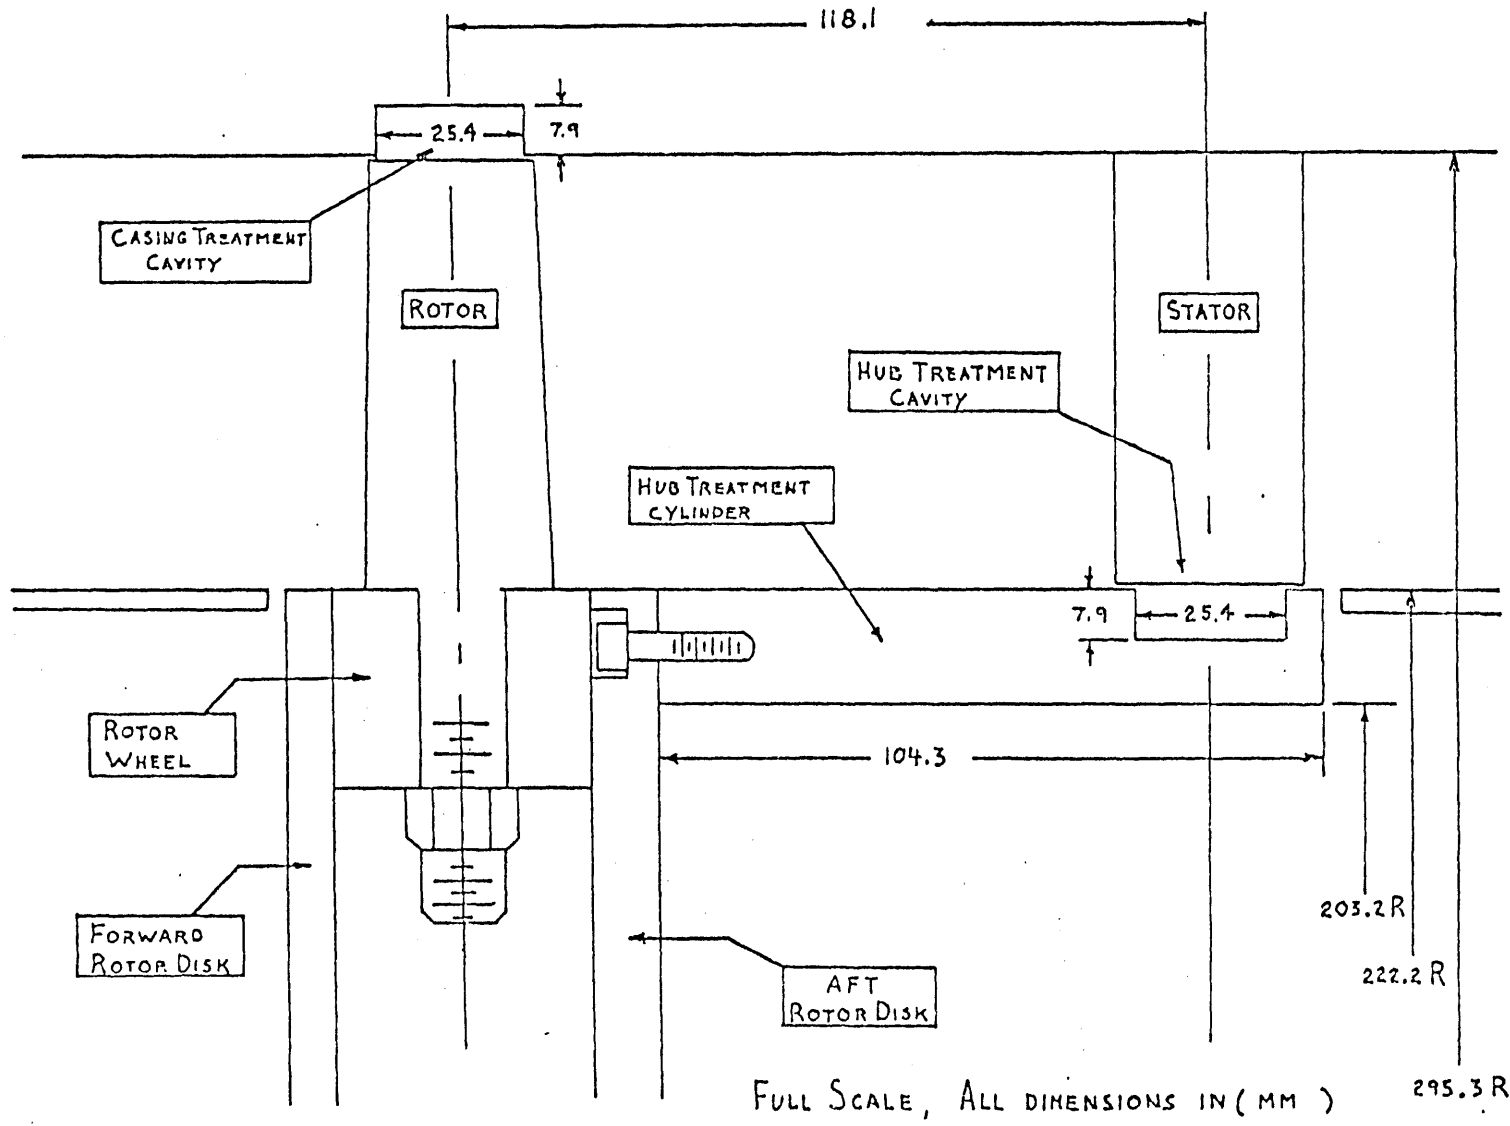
ROTOR/HUB TREATMENT ASSEMBLY
